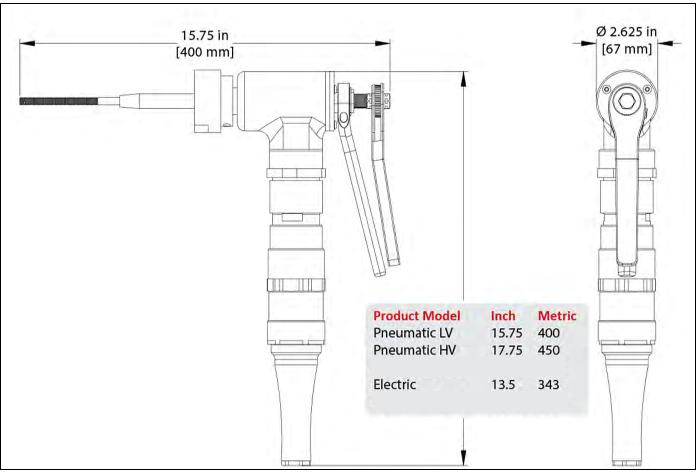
BG38 BOILER GUN DIMENSIONS
